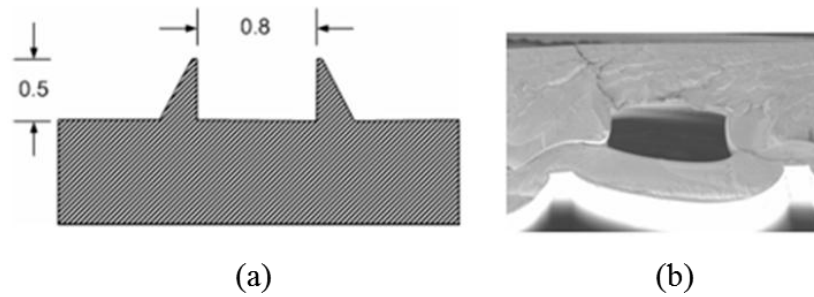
(a) Aluminum welding tool cross-section. (b) The polymer channel view after welding [28].
